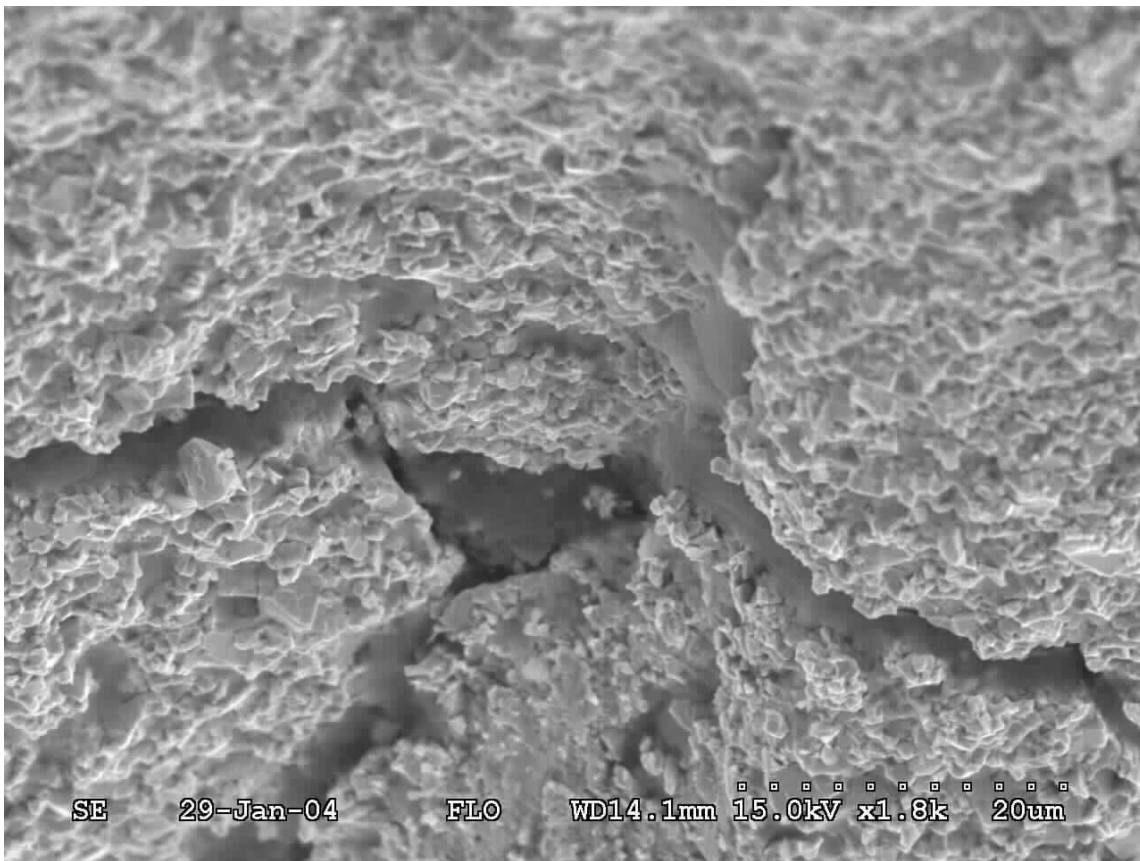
Fracture surface by compression with visible cracks. (Kennametal Hertel)
